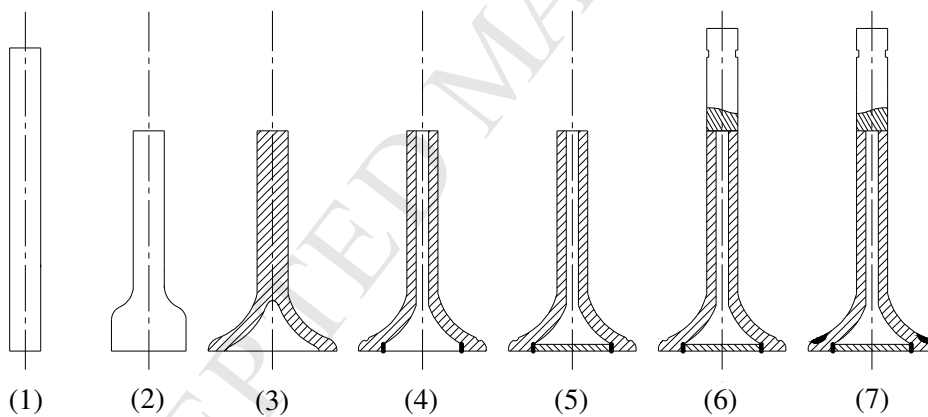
Manufacturing process of hollow head & sodium filled valve.
